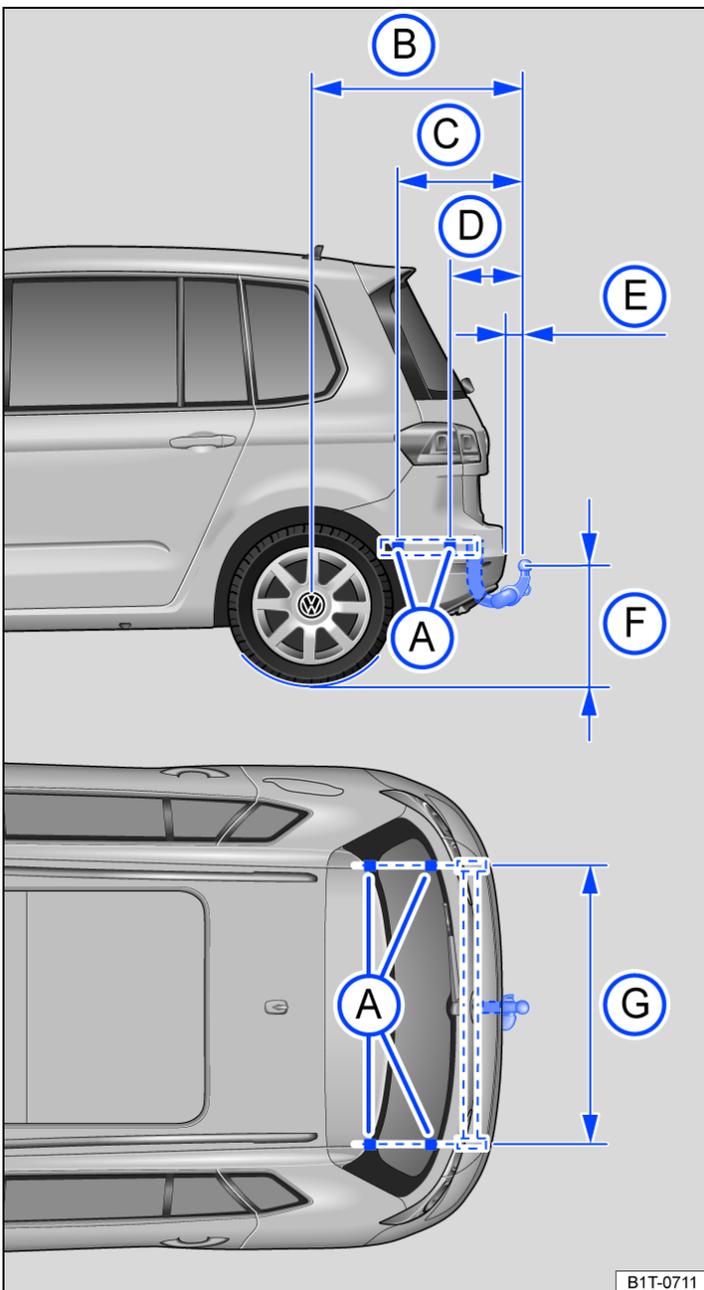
Dimensions and mounting points for retrofitting a trailer hitch.
